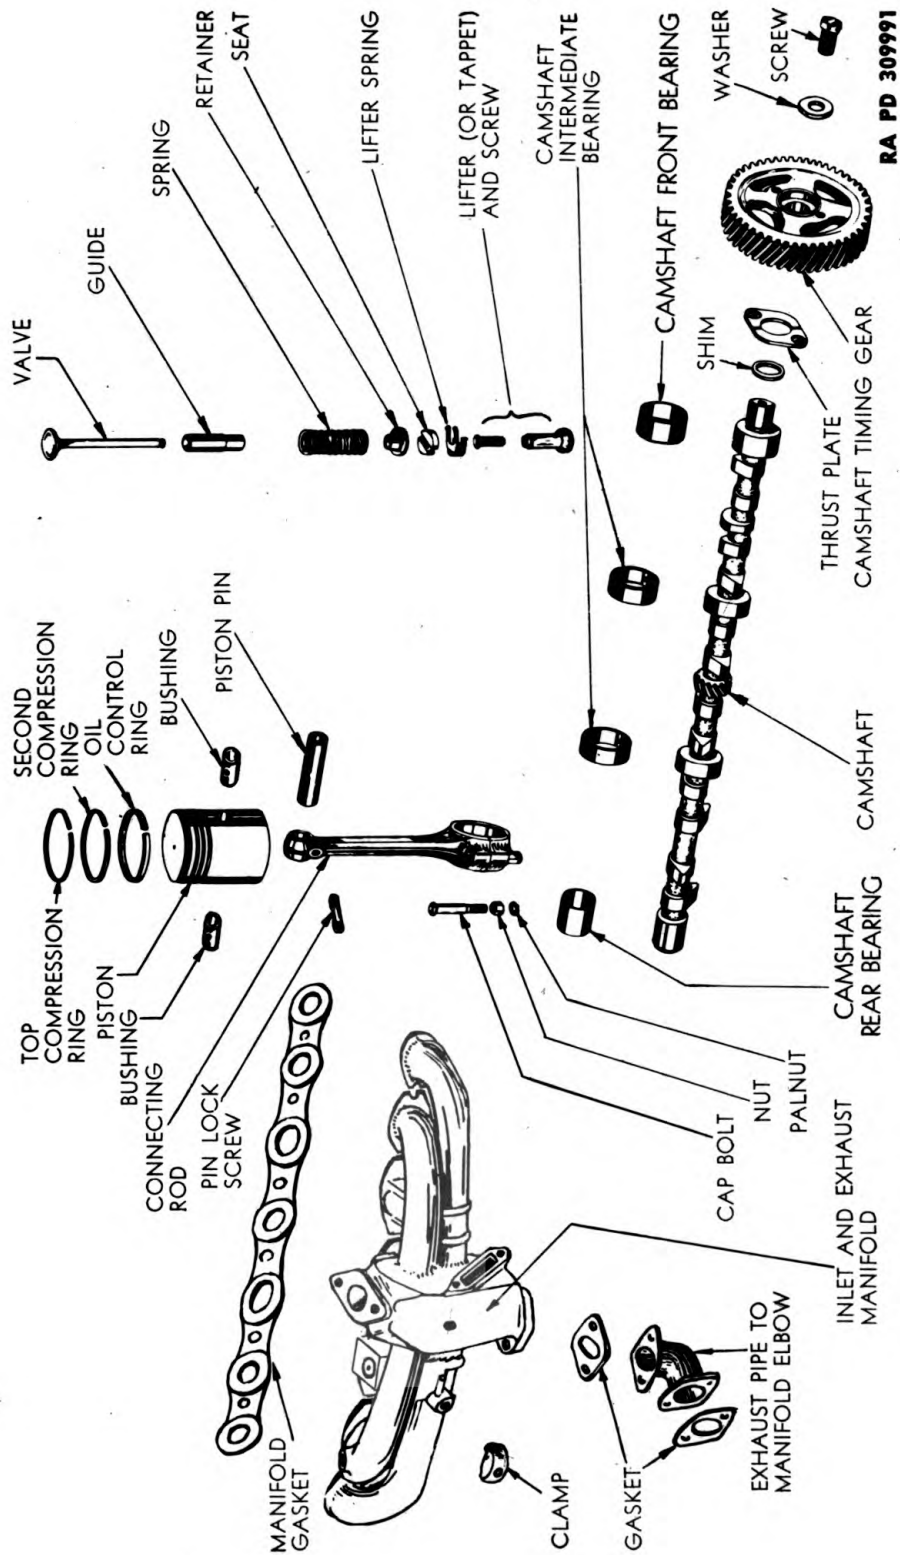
Manifold, Camshaft and Gear, Piston and Connecting Rod, and Valve Mechanism Parts
